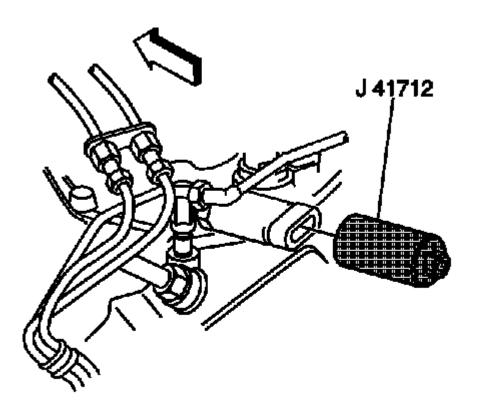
View Of J 41712 Removing The Fuel Pump/Oil Pressure Sensor Courtesy of GENERAL MOTORS CORP.
